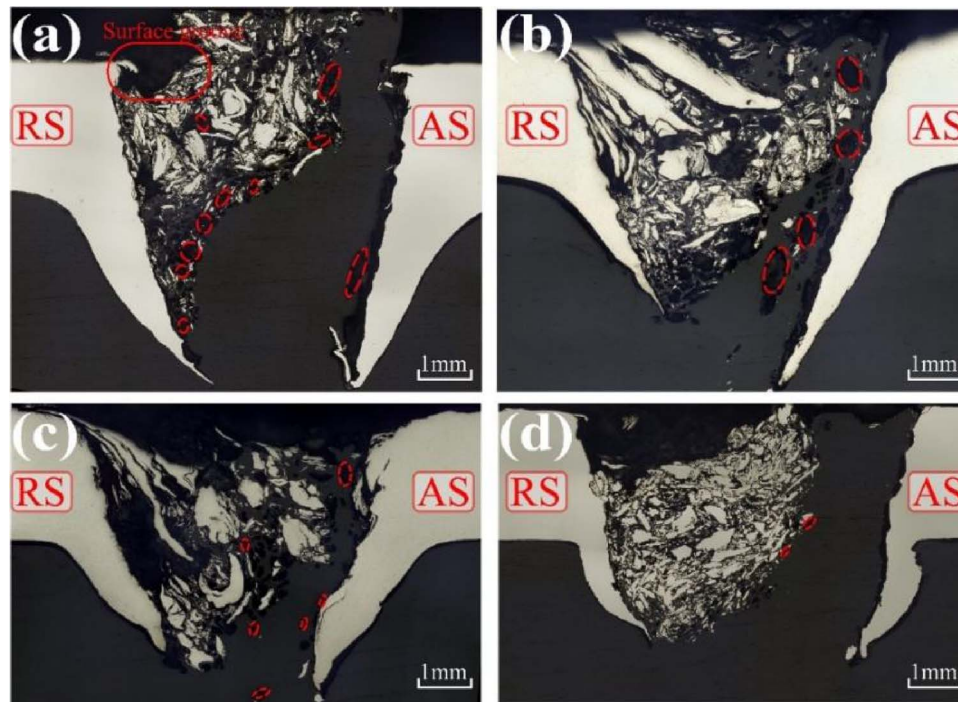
Partial magnified pictures of the macrostructures for the joints at different welding speeds: (a) 30 mm/min, (b) 50 mm/min, (c) 70 mm/min and (d) 90 mm/min.
